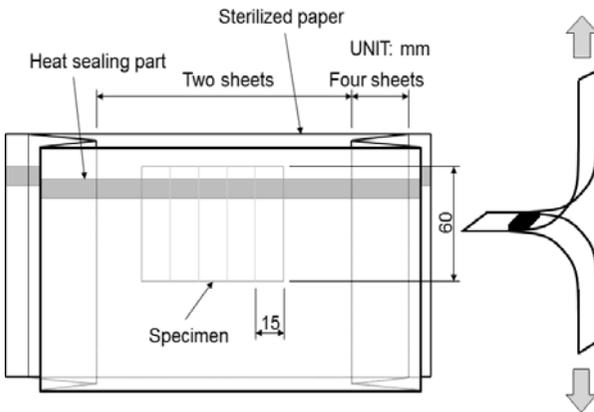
Schematic illustration of heat sealed sample bag and peel test specimen.
